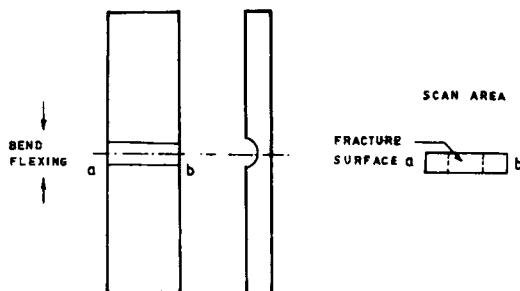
Mode of failure after bend flexing and scan area of fracture surface.
